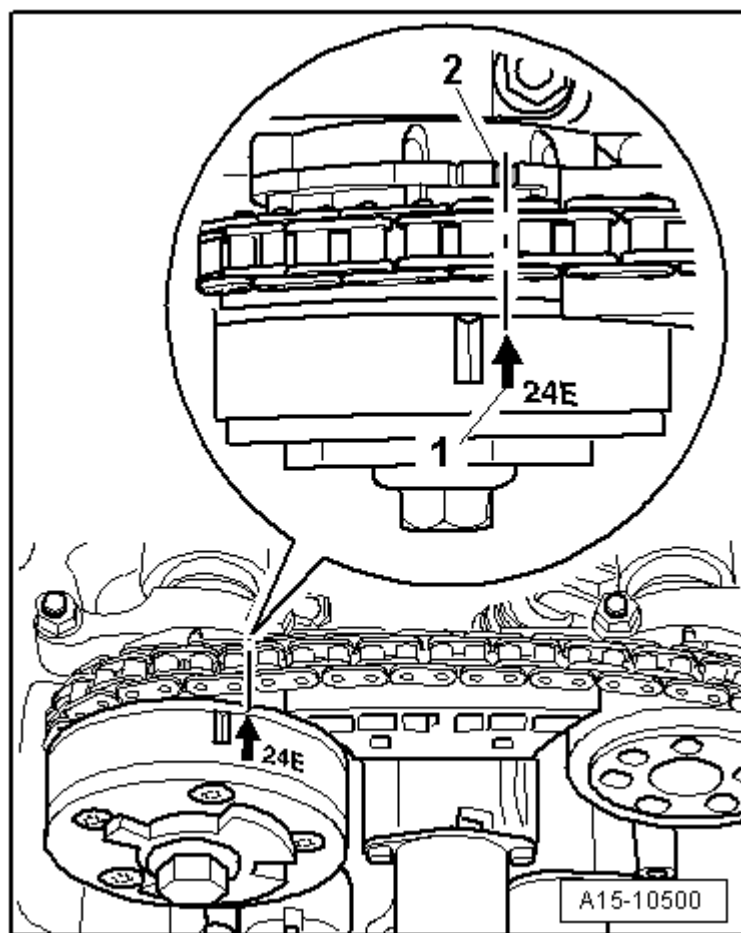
Verifying Installation Marks Of Intake Camshaft Adjuster With Marks On Control Housing
